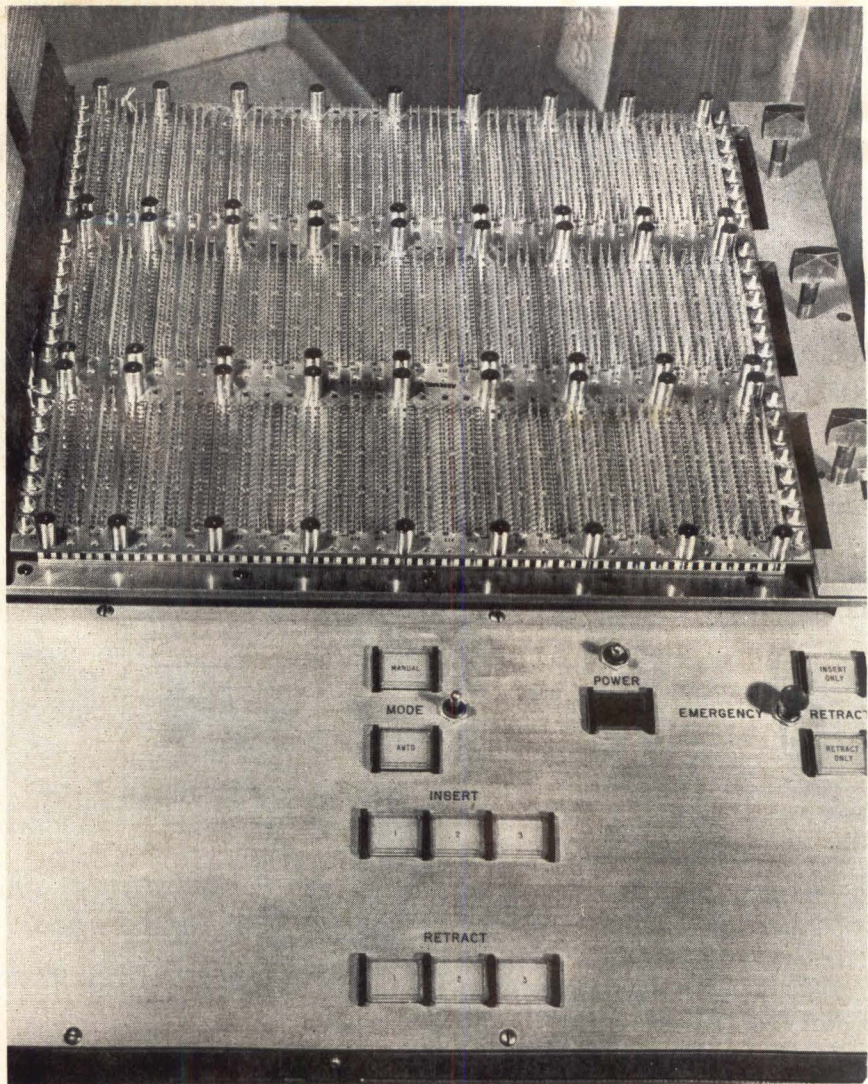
Cam-card access fixture with back-plane located in position, unclamped.
